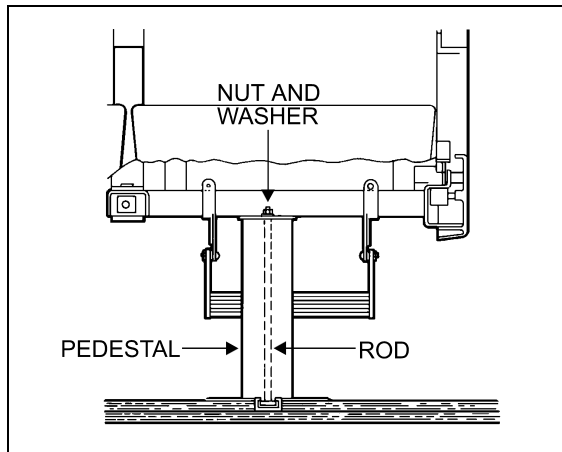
SEAT PEDESTAL ASSEMBLY
